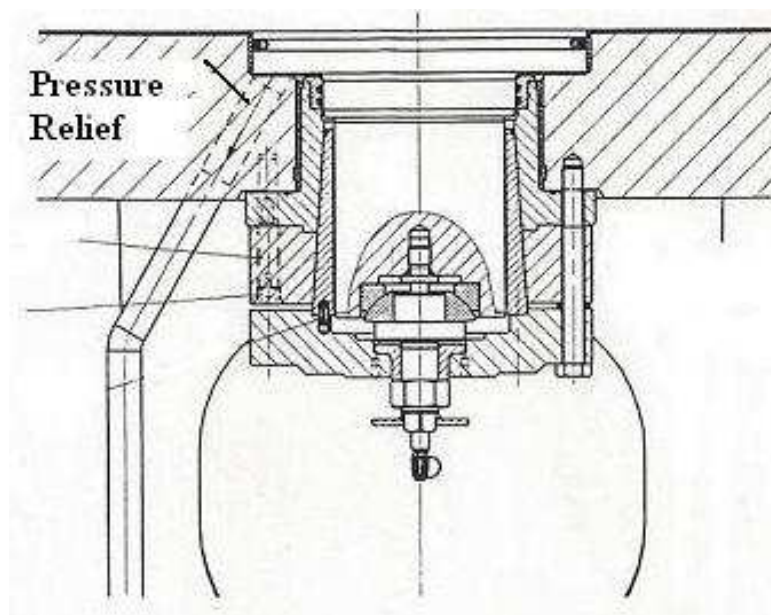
17: The schematic of a wicket gate and track guiding on the lower bearing [17].
